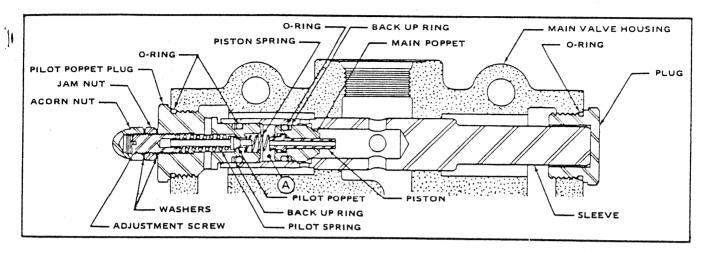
Relief Valve - Pilot Operated (External Adjustment)
